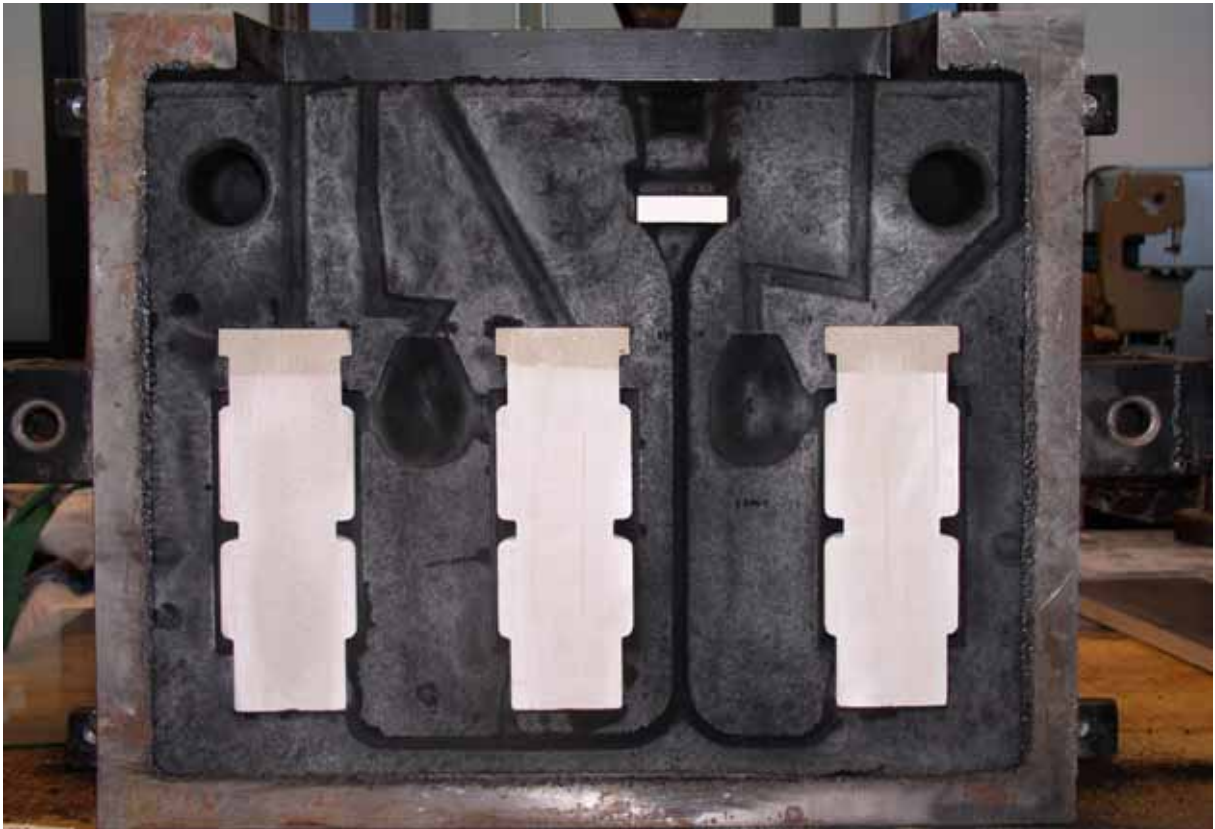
In the picture a mould used for the experiments using glass plate fronted moulds is seen.
